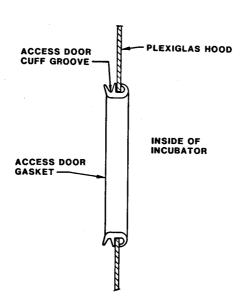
INSTALLATION OF ACCESS DOOR GASKET
